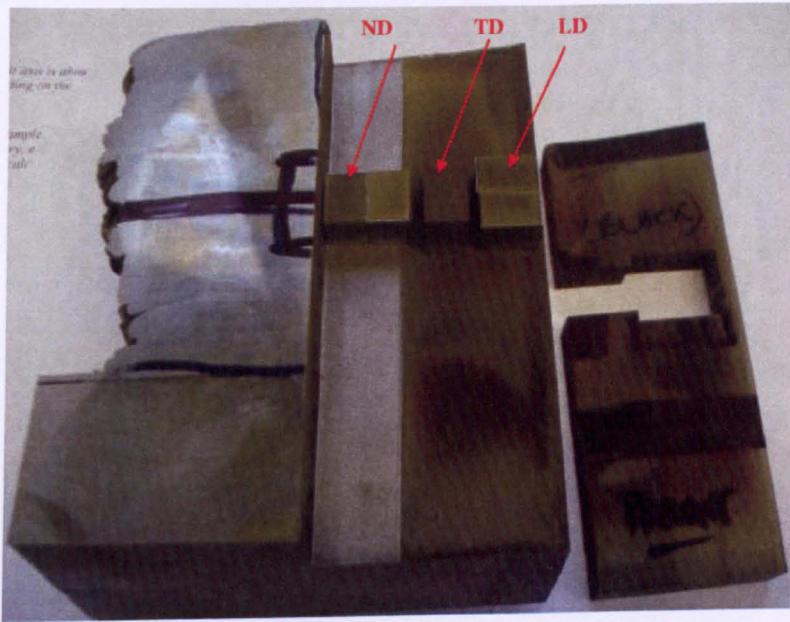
Orientation of the cuboids in the weld-pad
